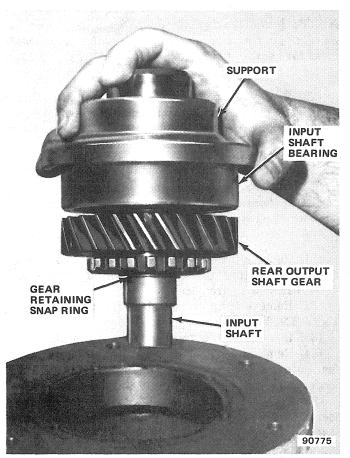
D-77 Front Support, Input Shaft and Rear Output Shaft Gear Removal/Installation
